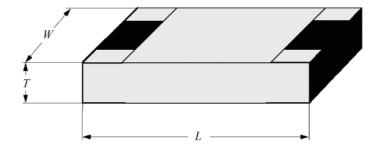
Shape and dimensions of rectangular (RR) resistors
